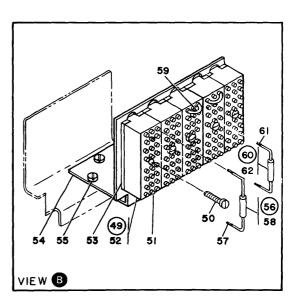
CE PANEL ASSEMBLY. SEE LIST 17.
